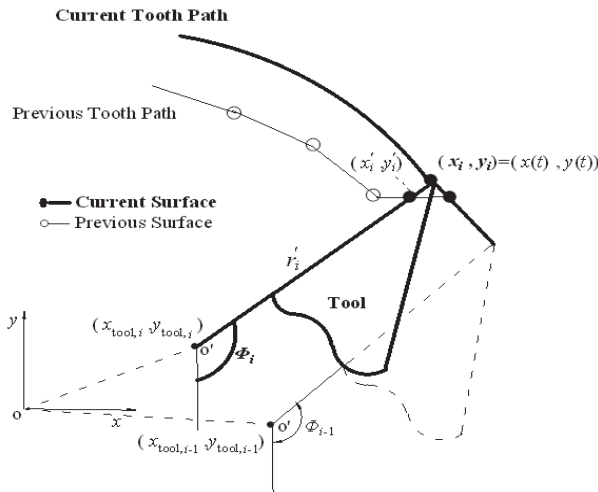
The geometrical relationship between tool and workpiece when tooth is entering surface
